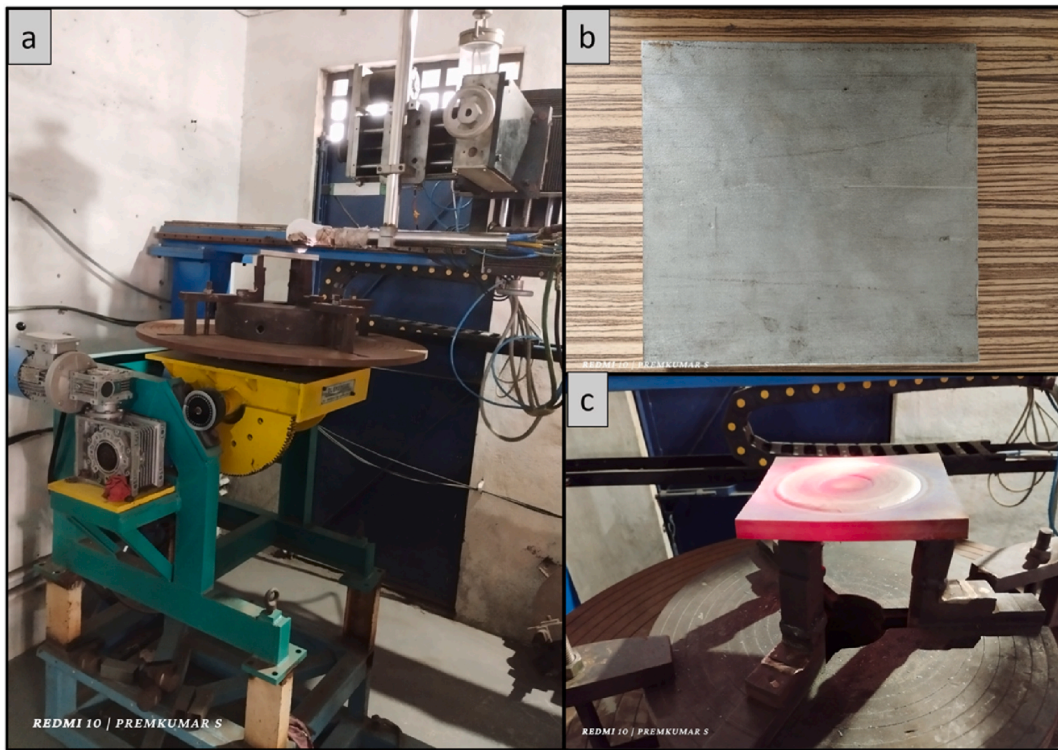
Experimental constituents (a) PTA weld unit (b) AISI 321 substrate (c) Deposited specimen.
